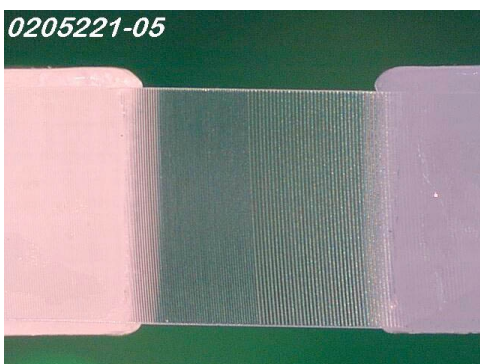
For an NRL experiment, the ridges on a patterned polystyrene film had to be mounted parallel to the edges of the Nike target holder. This target has two different patterns machined side by side.
